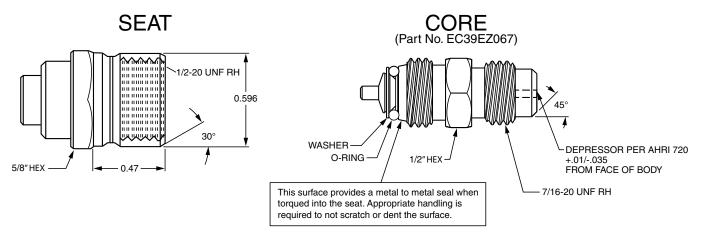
CoreMax<sup>1</sup> Access Port Assembly
